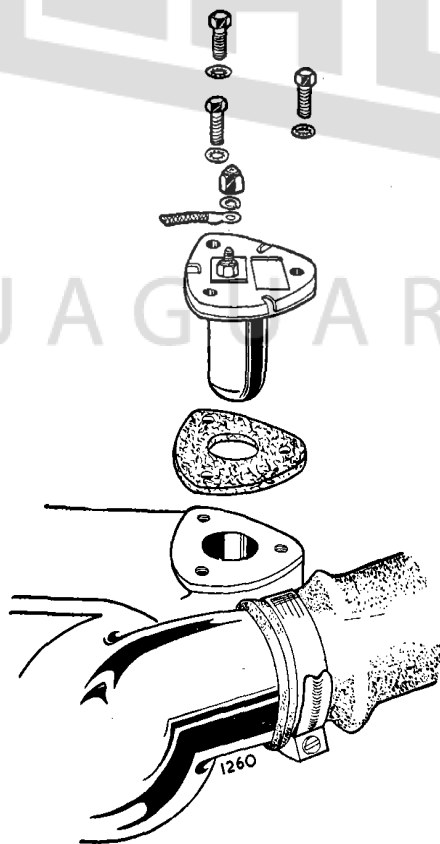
Removal of the auxiliary starting carburetter thermostatic switch.
